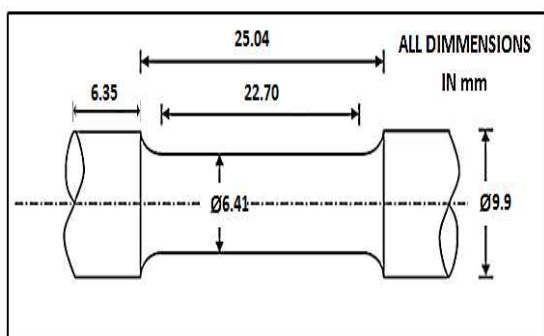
Tensile Specimen (ASTM-E8M) [19]
